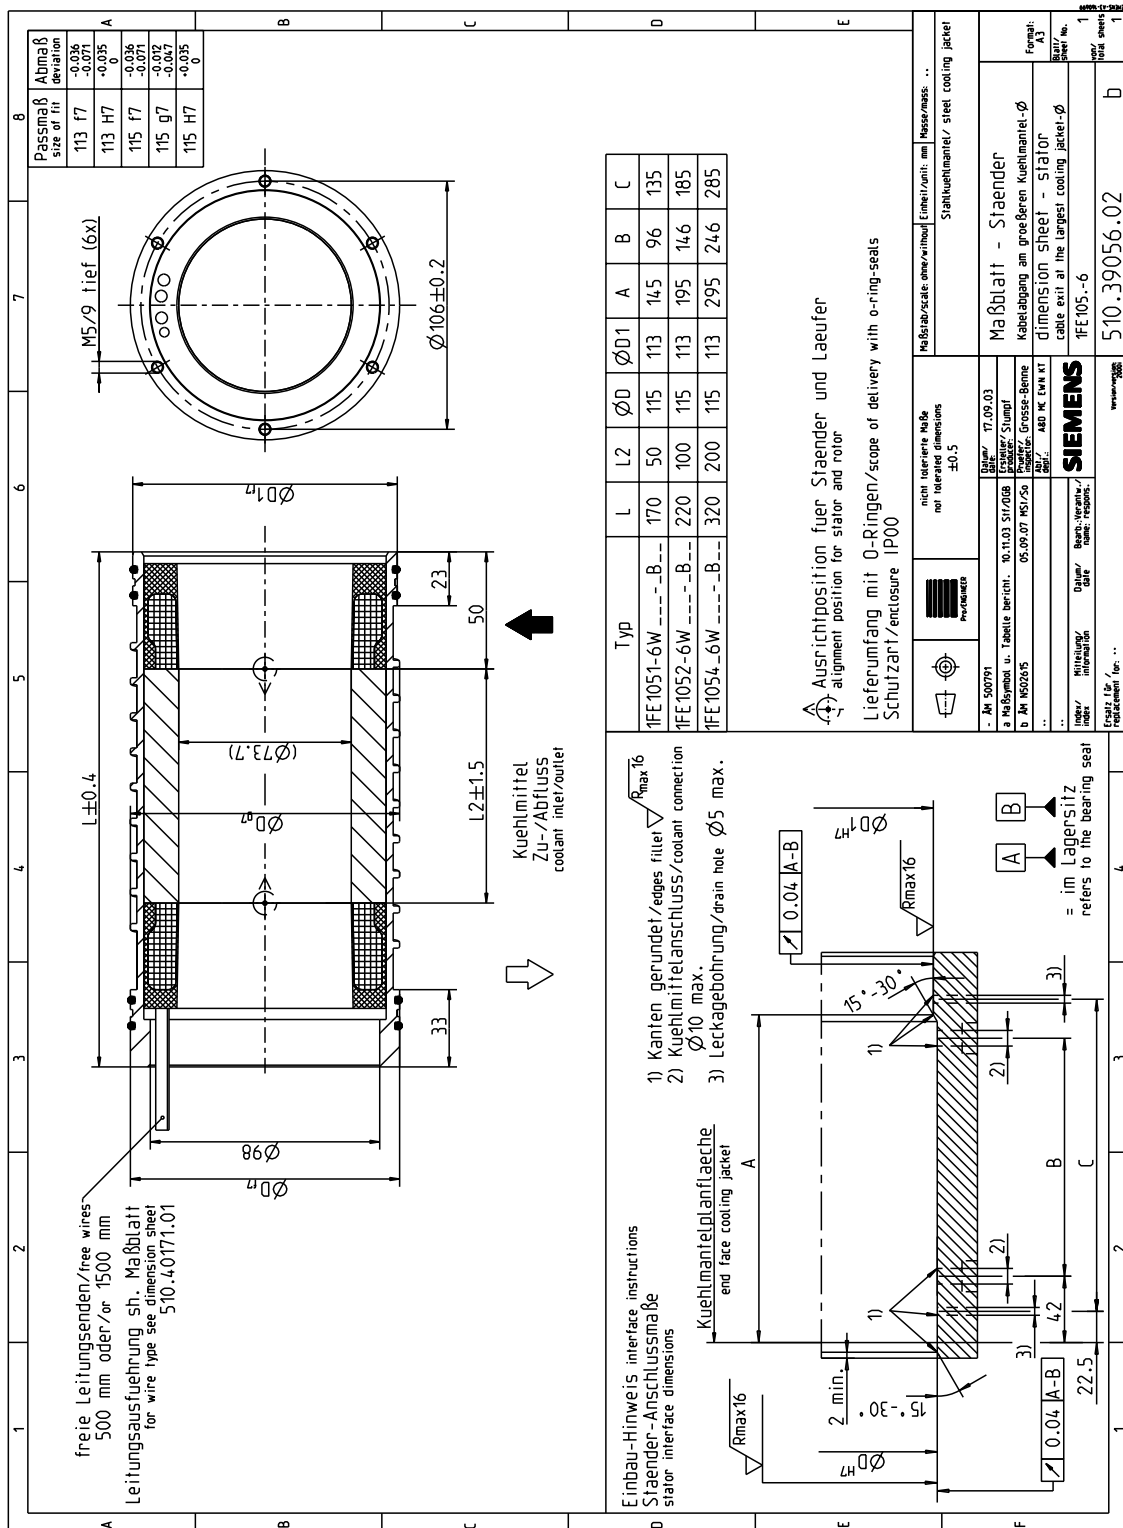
1FE105-6, stator with cooling jacket, cable outlet at the larger cooling jacket diameter
